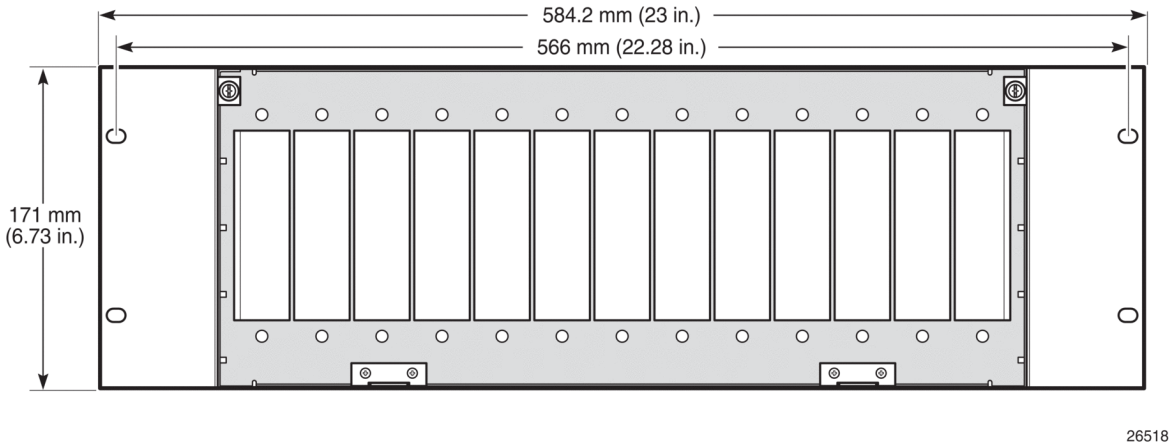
7360 ISAM Passive WM with standard 19 in. brackets
